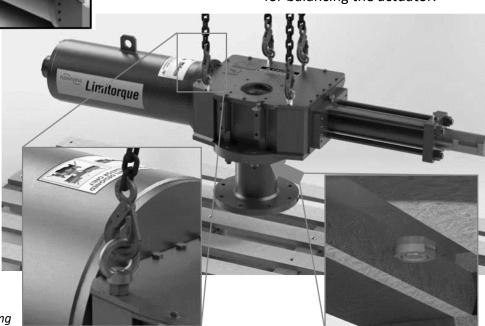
Correct Lifting of Hydraulic Single Acting Actuator
